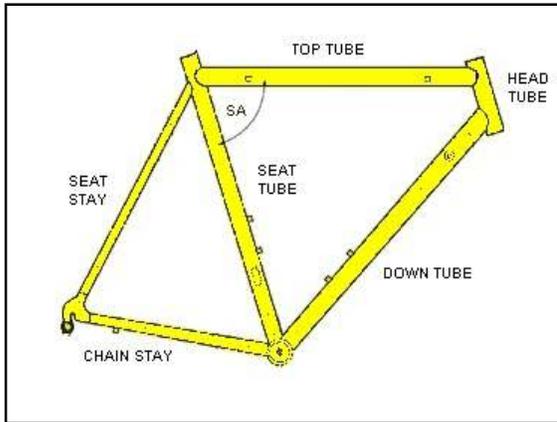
Traditional road frame and component tubes. Also shown is the angle between the top tube and the seat tube, the seat tube angle (SA). SA is an important dimension affecting the seat position fore-aft and will be discussed on page 19 and page 40.
